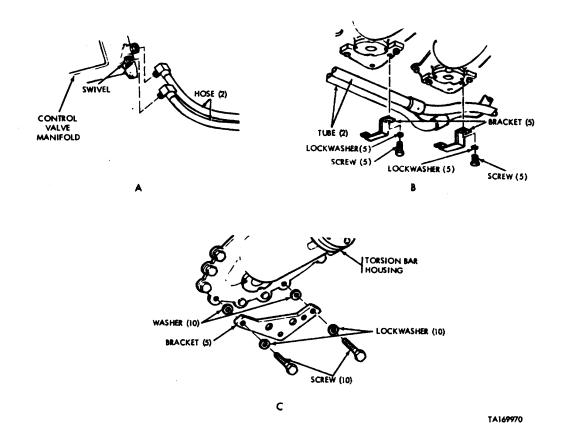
Removal or installation of lower hoses, tubes, and guards.
